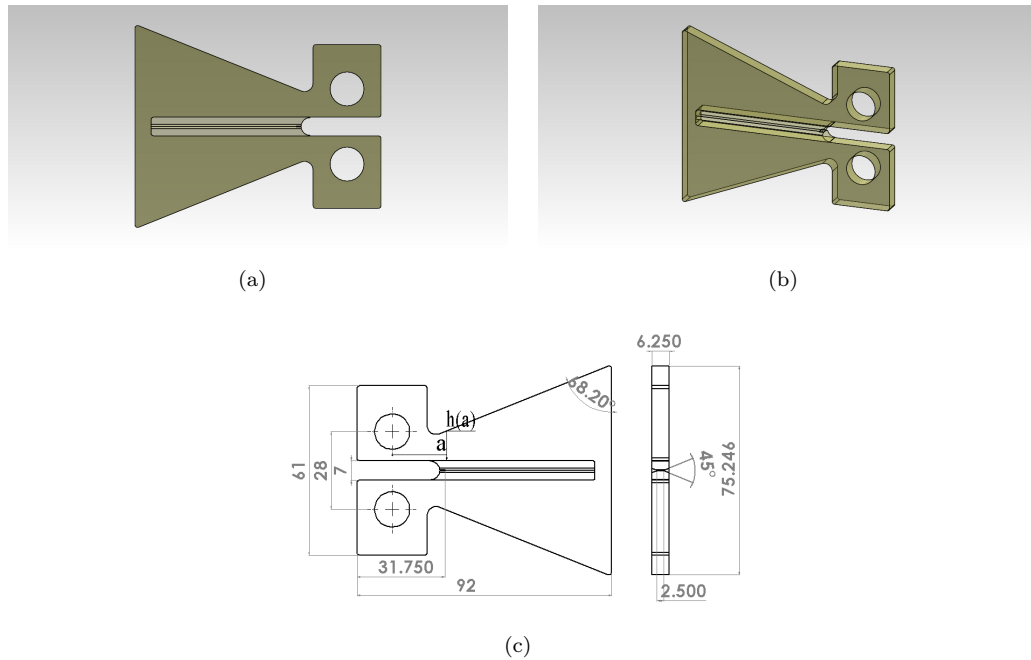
Solid drawings of TDCB specimen, (a) front-view, (b) trimetric view, and (c) Some basic dimension (mm) of the self-healing test specimen
